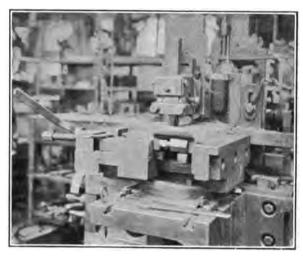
Finishing shoes and wedges in the draw-cut shaper.
